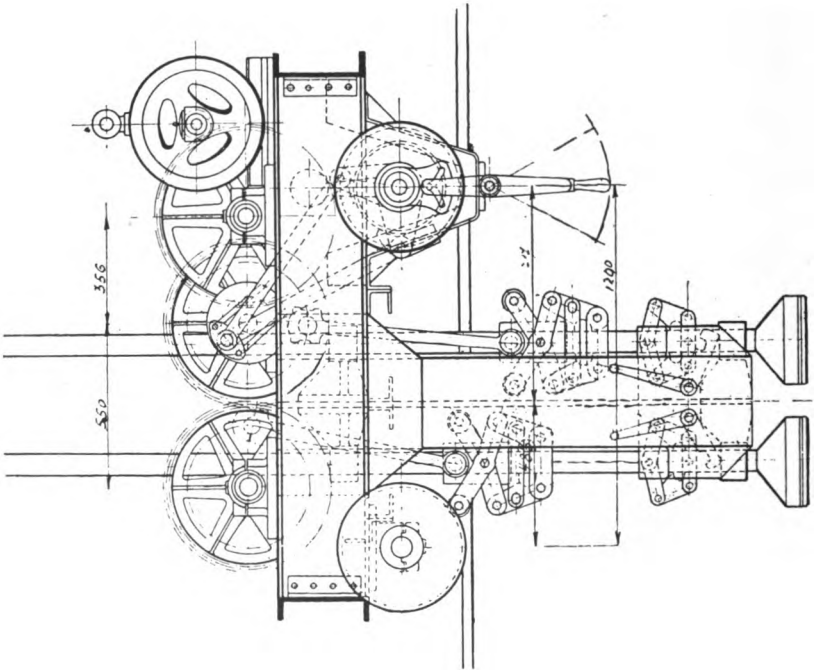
THE MEGIN STAMPING MACHINE.
